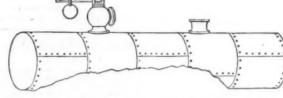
Top of Steam Drum, Shown in Fig. 6, After Explosion.
